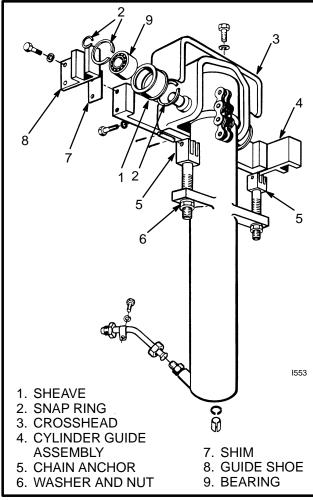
FREE-LIFT CYLINDER AND CROSSHEAD
